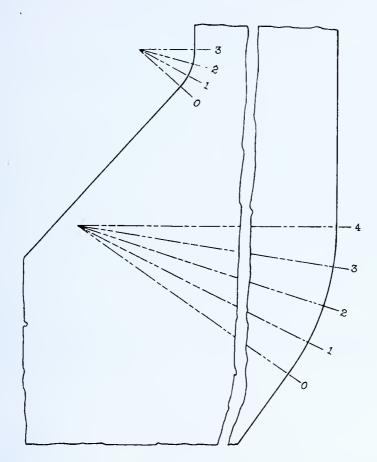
Enlarged View of Top of Uptake Layout in Fig. 336
